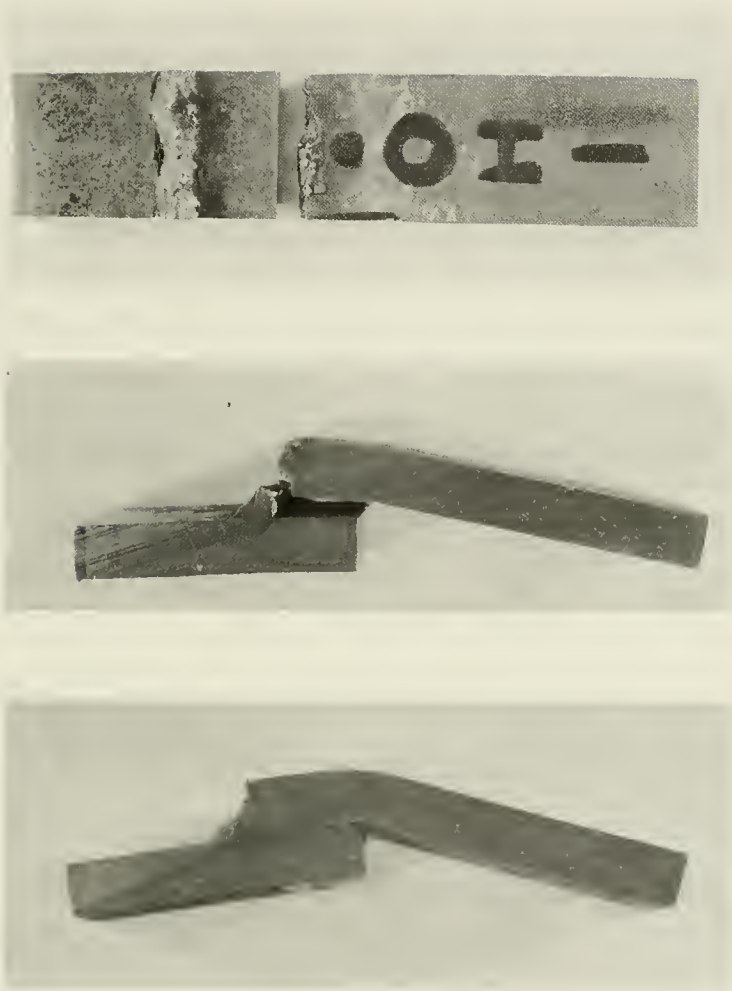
RESULTS OF BEND TEST ON OVERHEAD WELDED LAP JOINT
